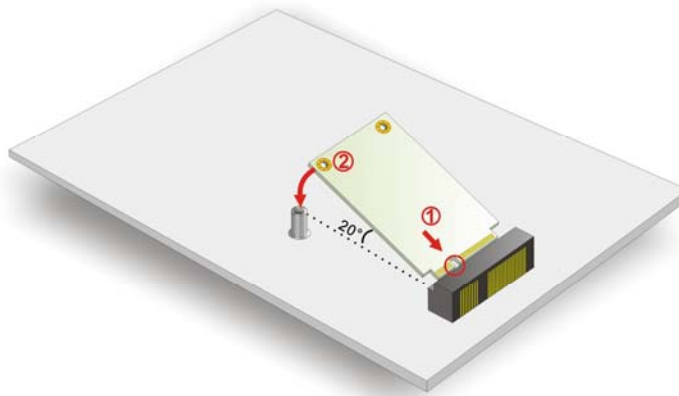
Inserting the PCIe Mini Card into the Socket
